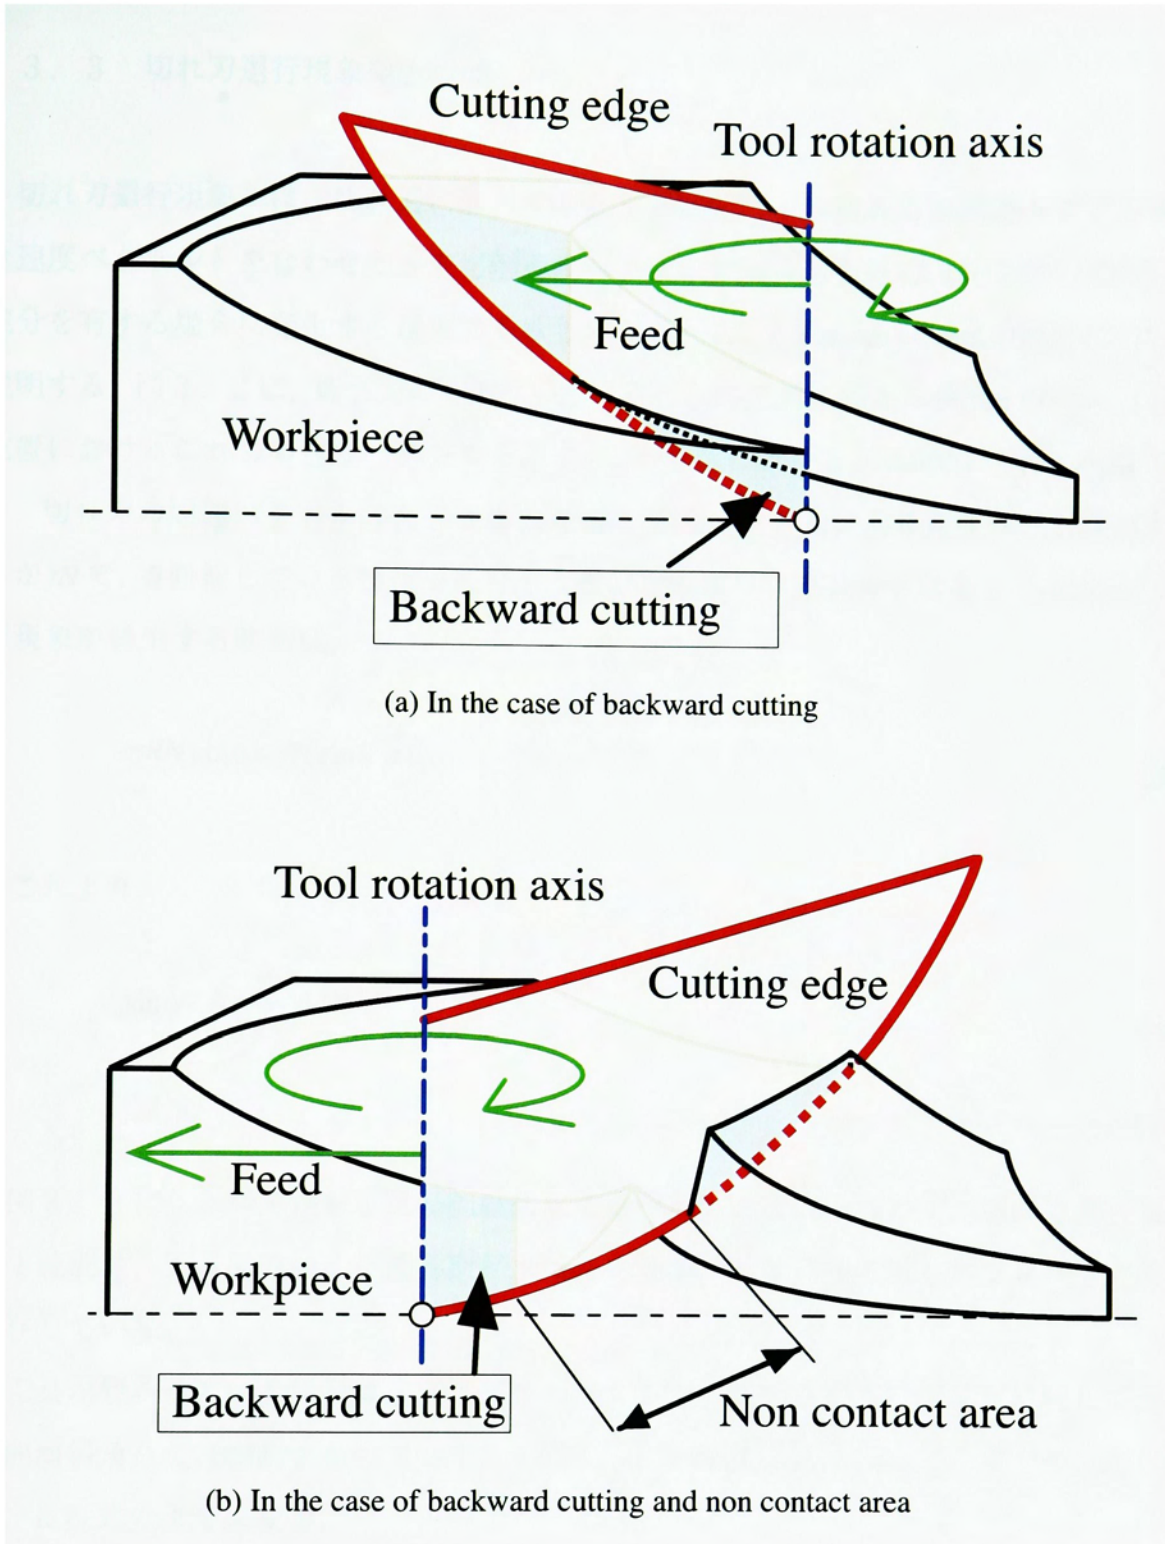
Model of interference between cutting edge and workpiece around the center of tool
